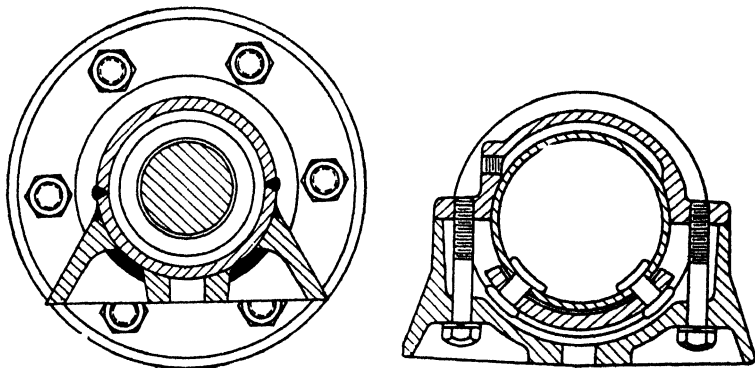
MOUNTINGS FOR UNDERSLUNG REAR SPRINGS.
